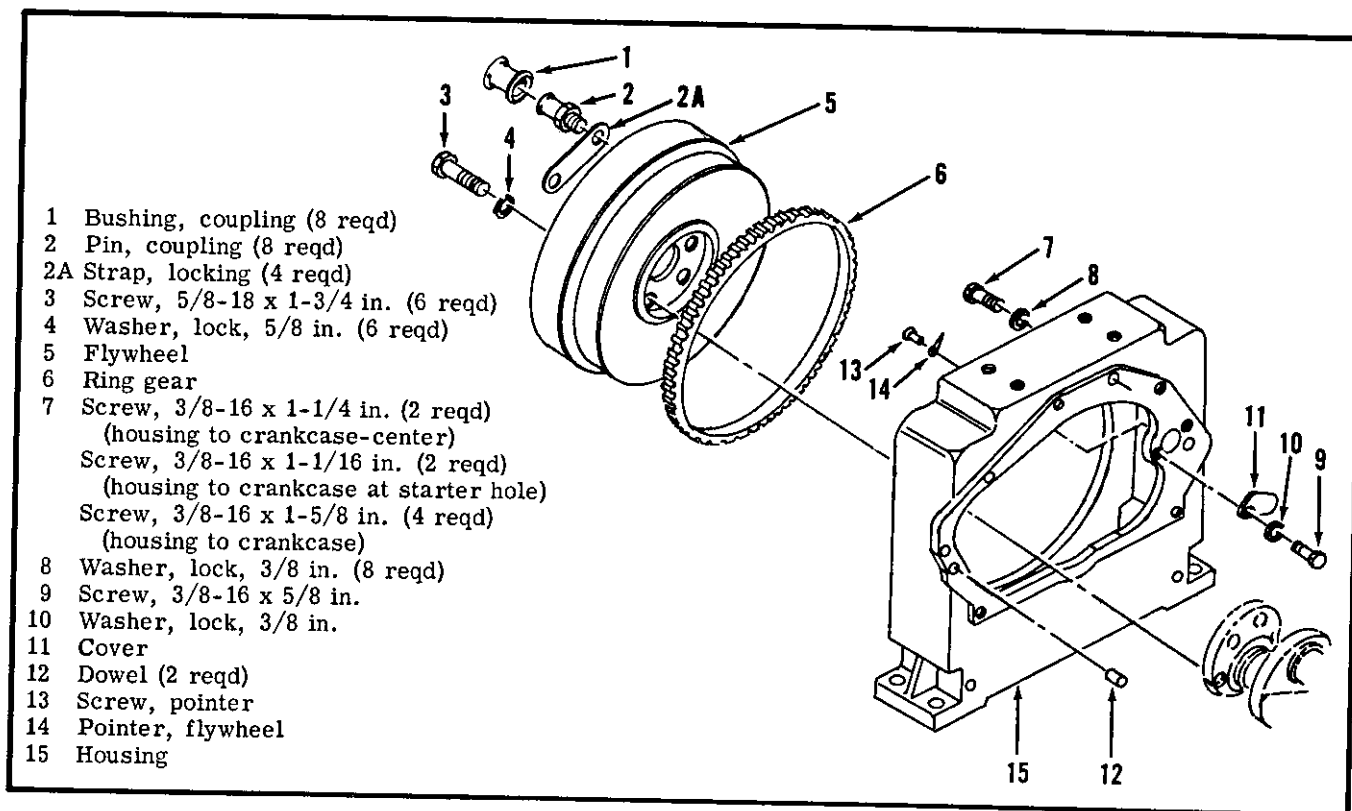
Engine Flywheel and Flywheel Housing, Disassembly and Reassembly
